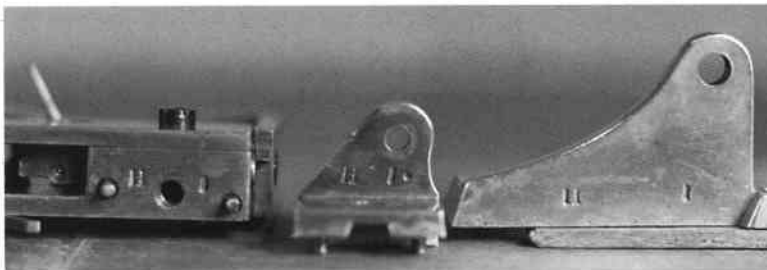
Blank numbers on governor block, cylinder bearing, and inner spring bearing which has a vertical front end common on early boxes.
